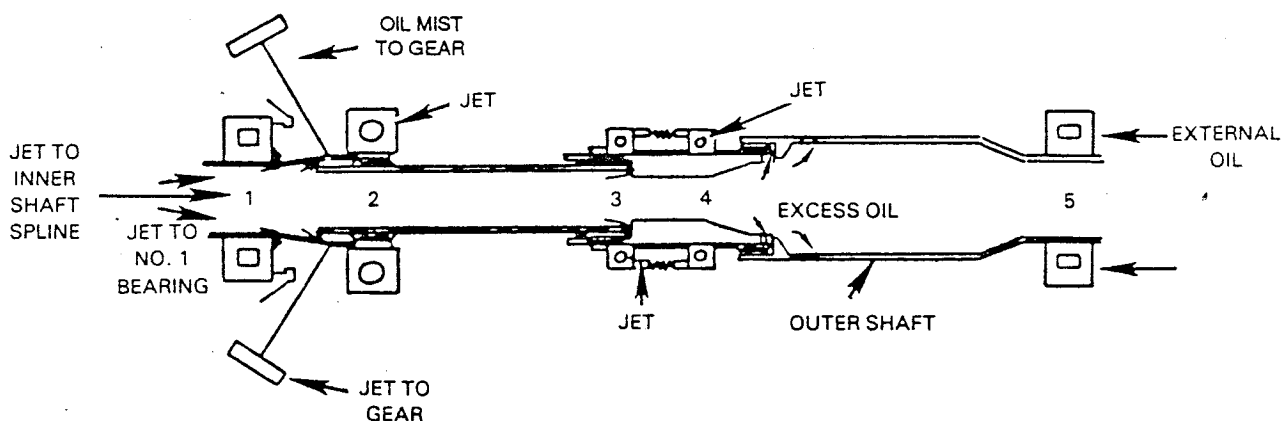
Schematic of Lubrication Scheme for the Accessory Drive System
